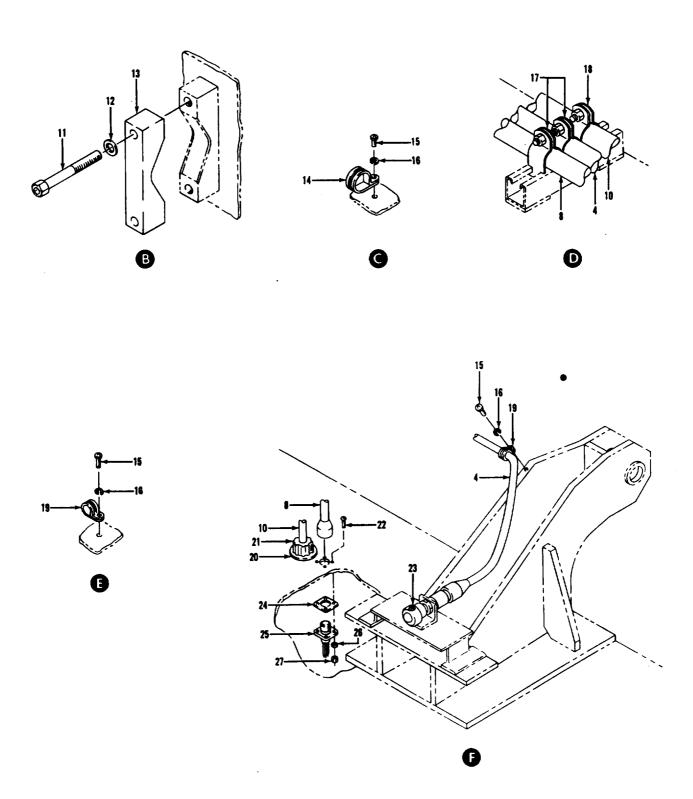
Electrical Equipment Installation (Sheet 3 of 19)
